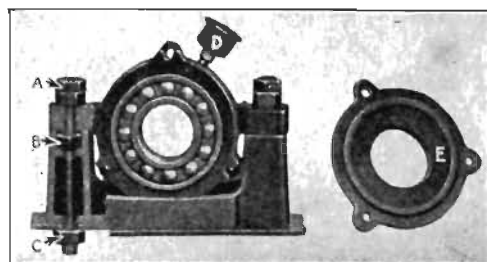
Sectional view of cylinder-shaft bearings: *A*, nuts for holding the bearing to its supporting frame; *B* and *C*, method of bolting the bearing frame to thresher; *D*, grease cup for lubricating bearing; *E*, cylinder-bearing cover.
